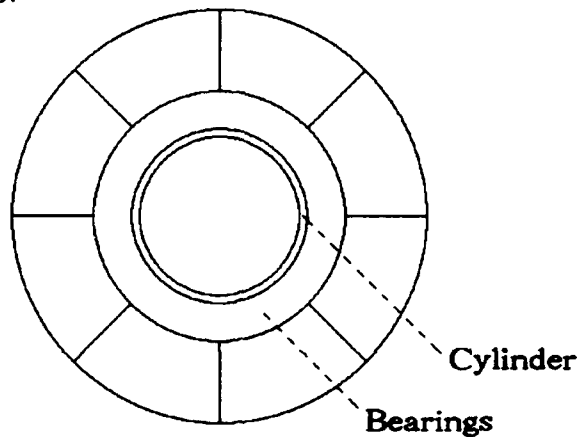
Side View of Spokes Assembly, Bearings, and Cylinder
